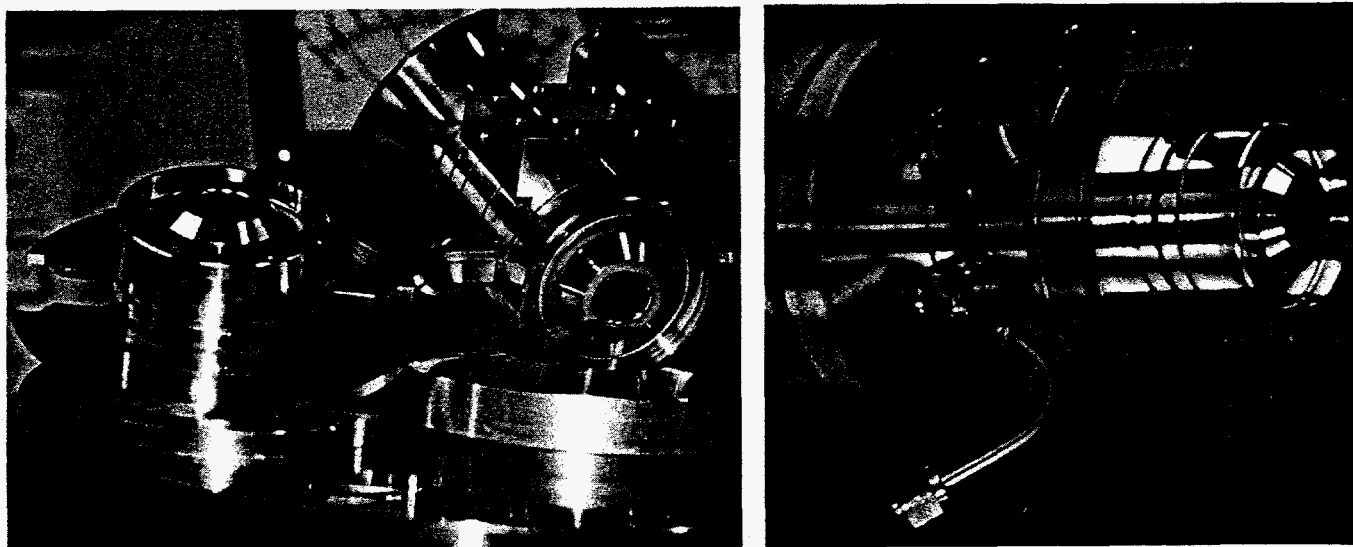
11.4 GHz HOM Damped Output Structure During Final Assembly.
